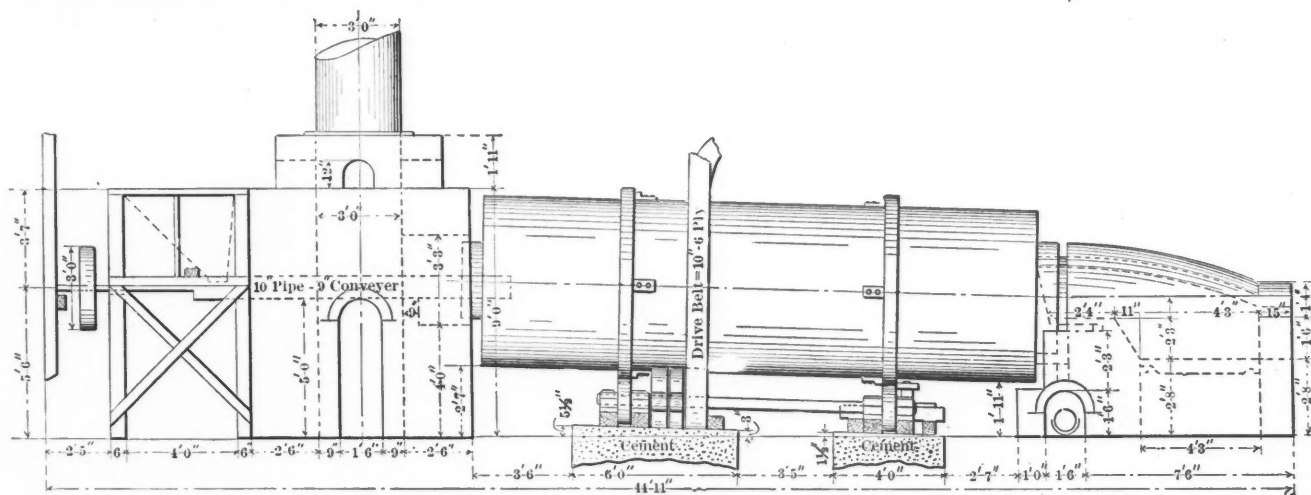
SIDE ELEVATION OF CYLINDRICAL FURNACE
